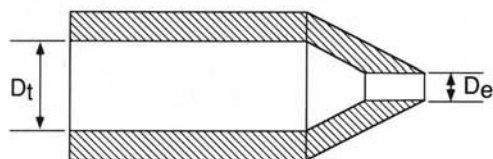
Design principle of a commercial oxygen–acetylene burner.
